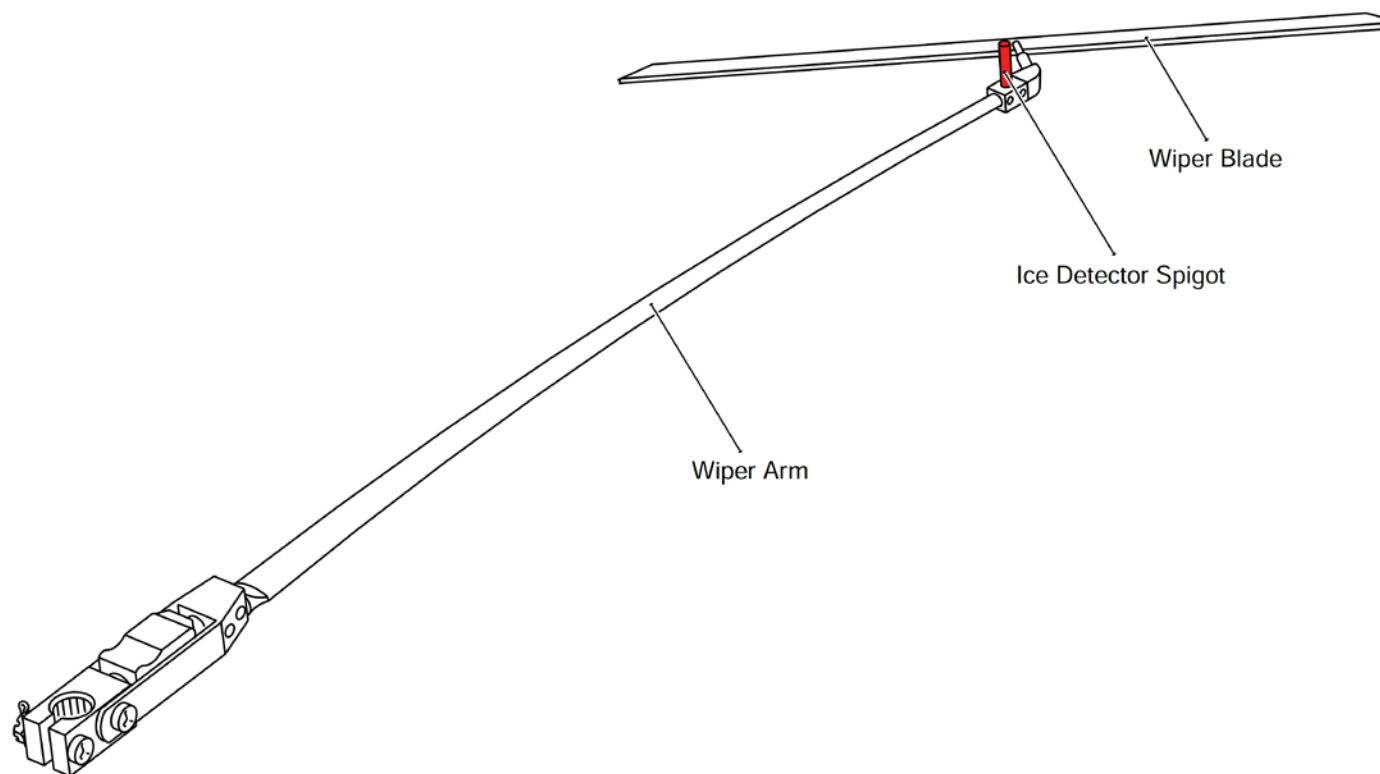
Windshield Shield Wiper Arm and Blade – Location
